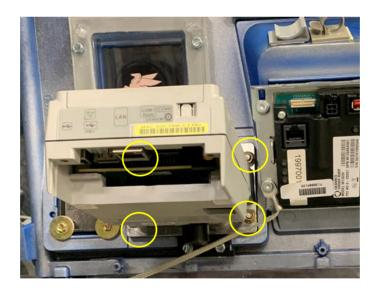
Encore 700S Location of Card Reader plate screws
